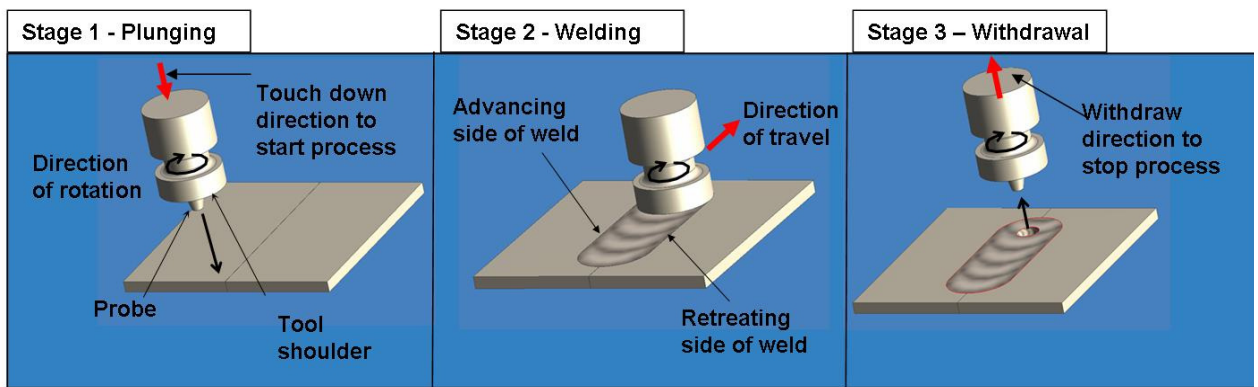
Schematic diagram showing the basic principles of the friction stir welding process.
